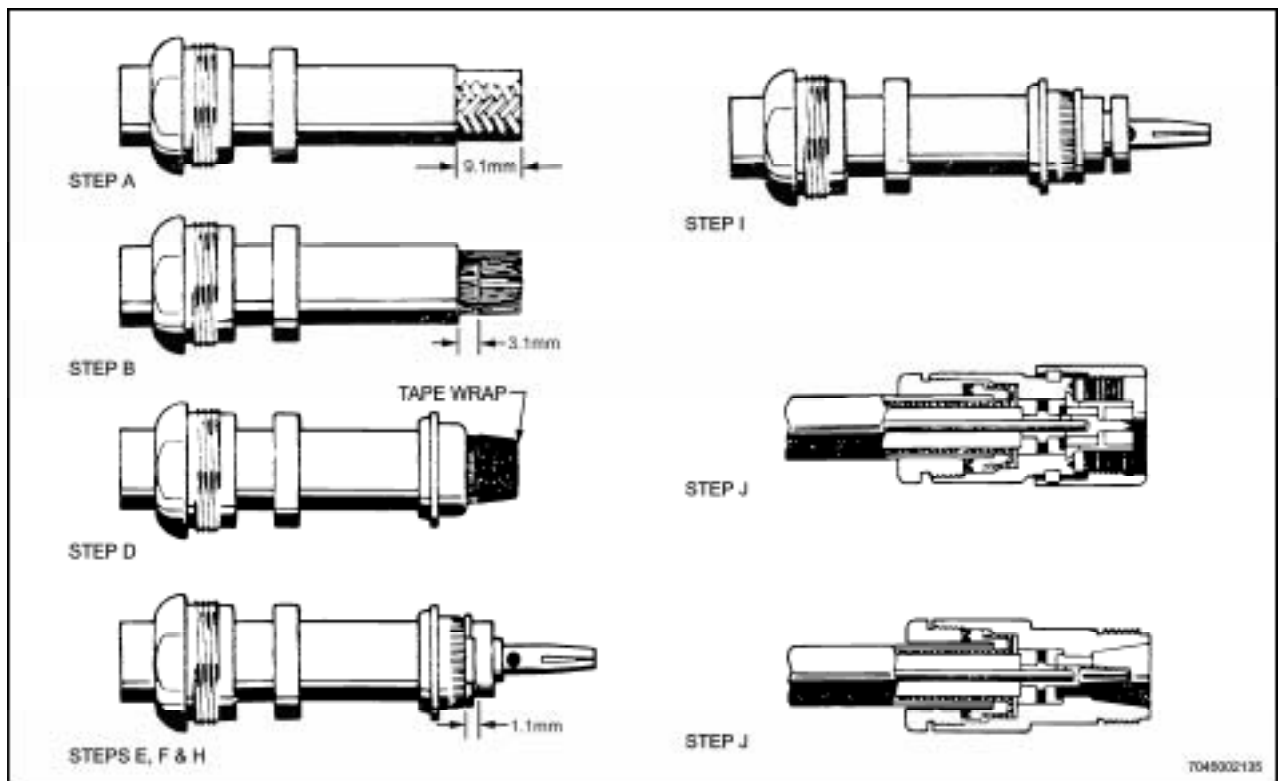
Attaching N Connectors with Captivated Contacts to Coaxial cable
